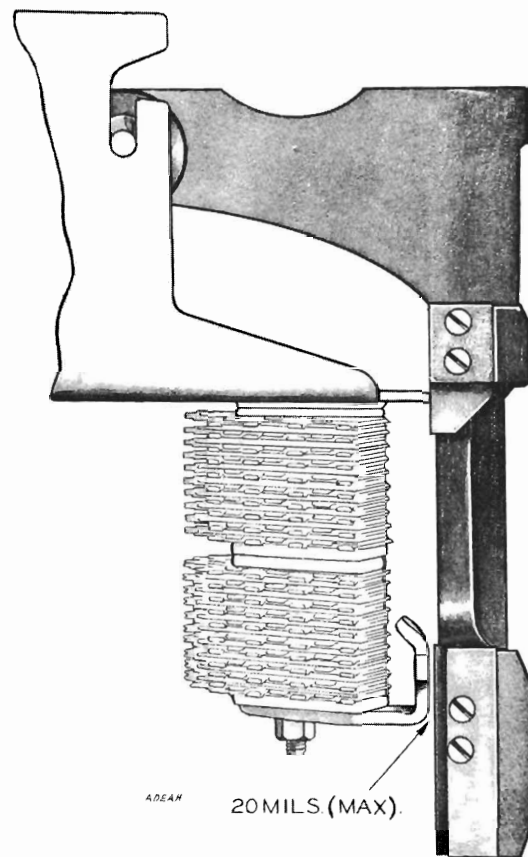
CLEARANCE BETWEEN LOWER ENGAGEMENT FACE ON "GAUGE, SELECTOR-BANK, No. 1" AND FACE OF LOWER BANK-PLATE LUGS
